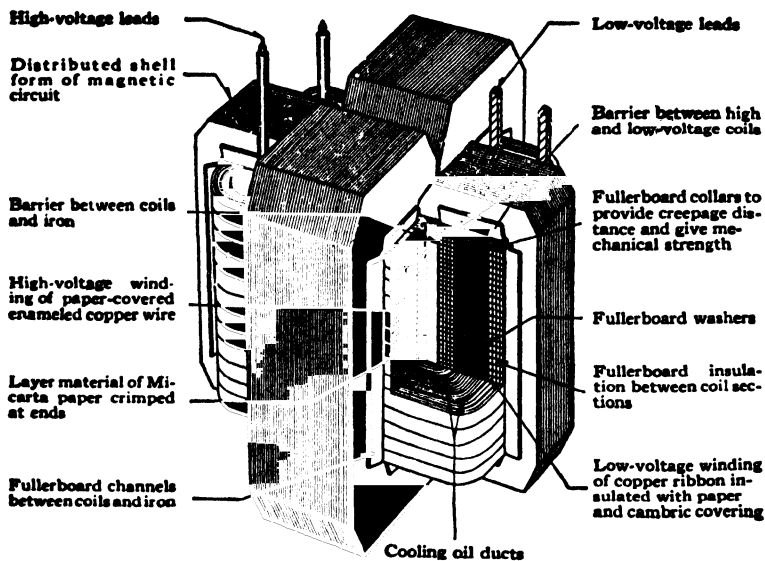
Distributed shell-type (cruciform) transformer showing core, coils, cooling ducts, and insulation.
